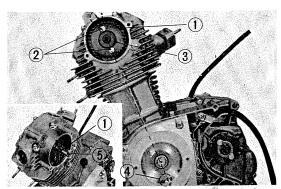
① Cam chain ② 6mm bolts ③ Cam sprocket ④ "T" aligning mark ⑤ Cam shaft
